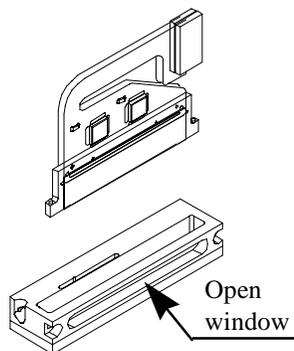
Modified manifold assembly with an opening on collar for the measurement of transducer's surface.
